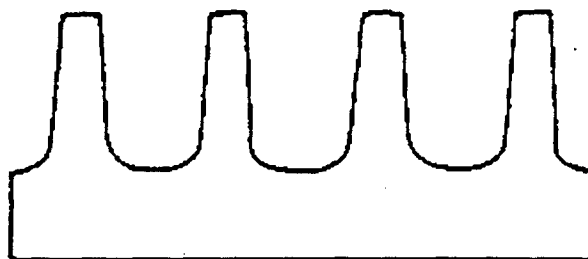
Cross-sectional schematic of integral-fin tube surface
